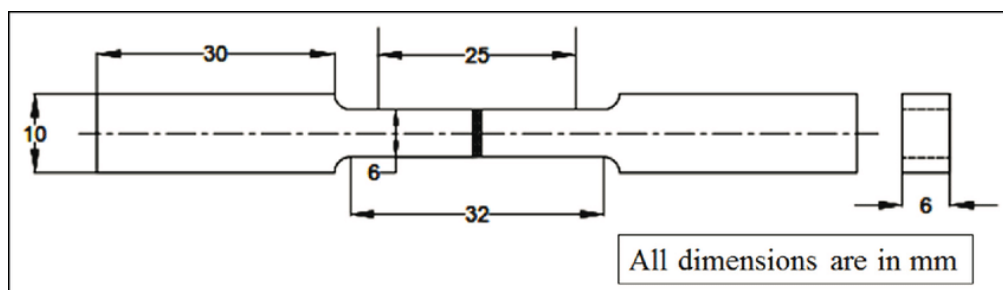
Standard Geometric of ASTM-E8 for Tensile Test's Specimen
